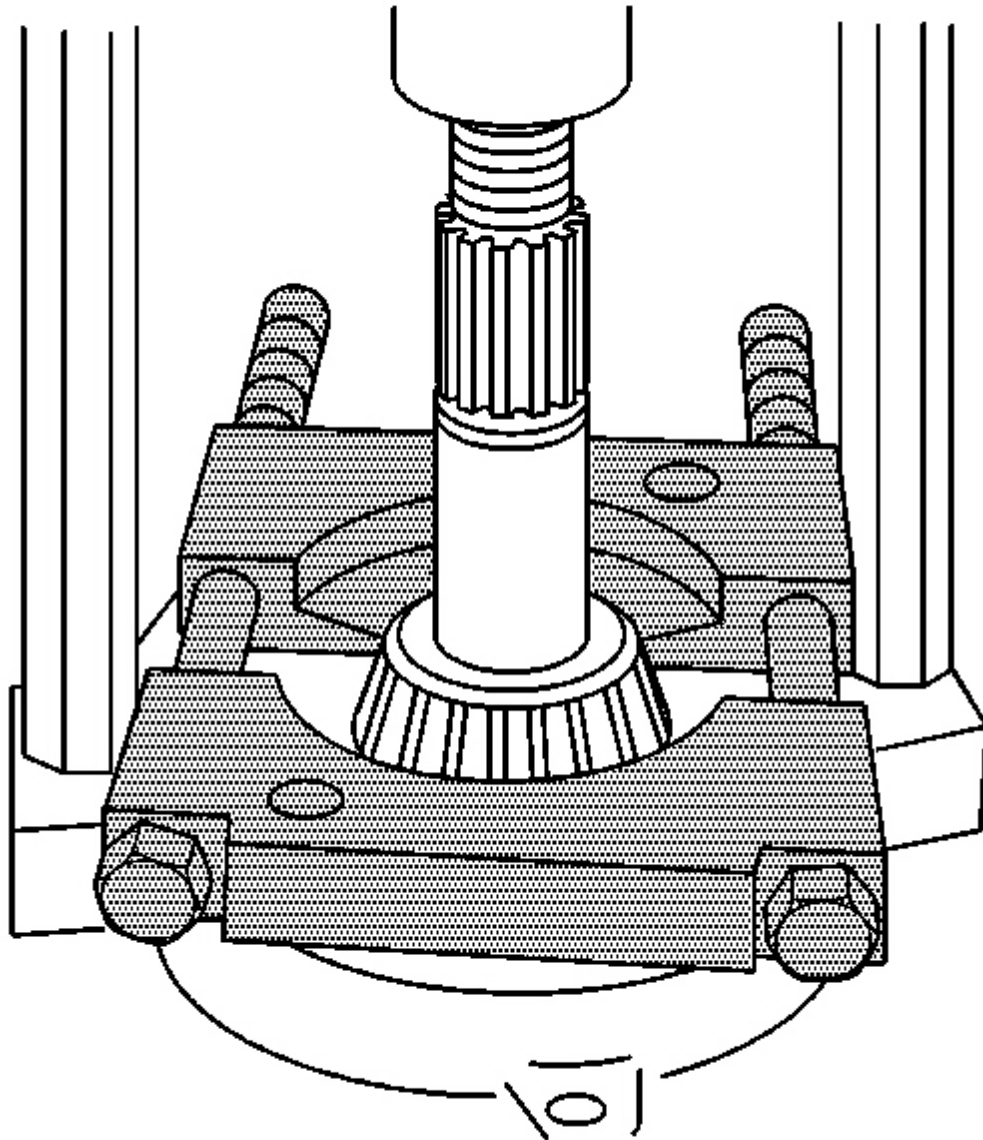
View Of Inner Pinion Bearing & Hydraulic Press
